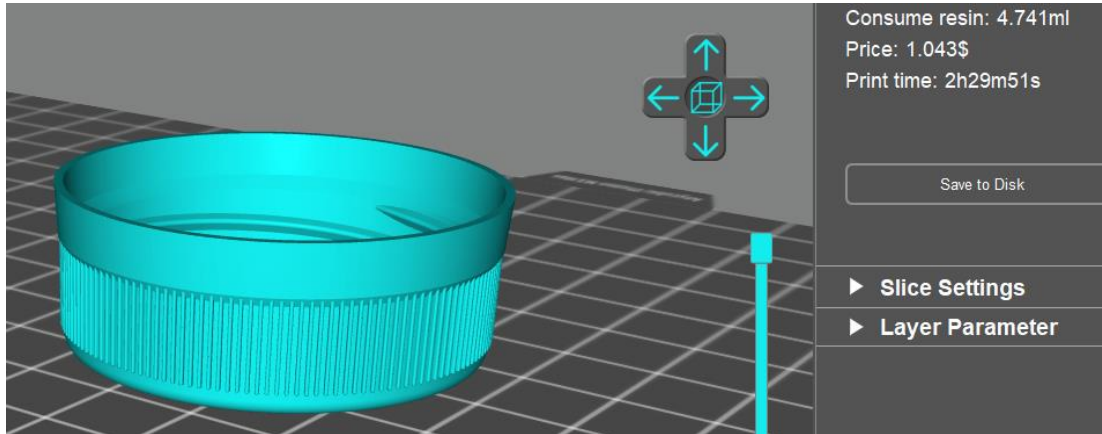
Horizontal positioning of the part on the 3D printer plate
